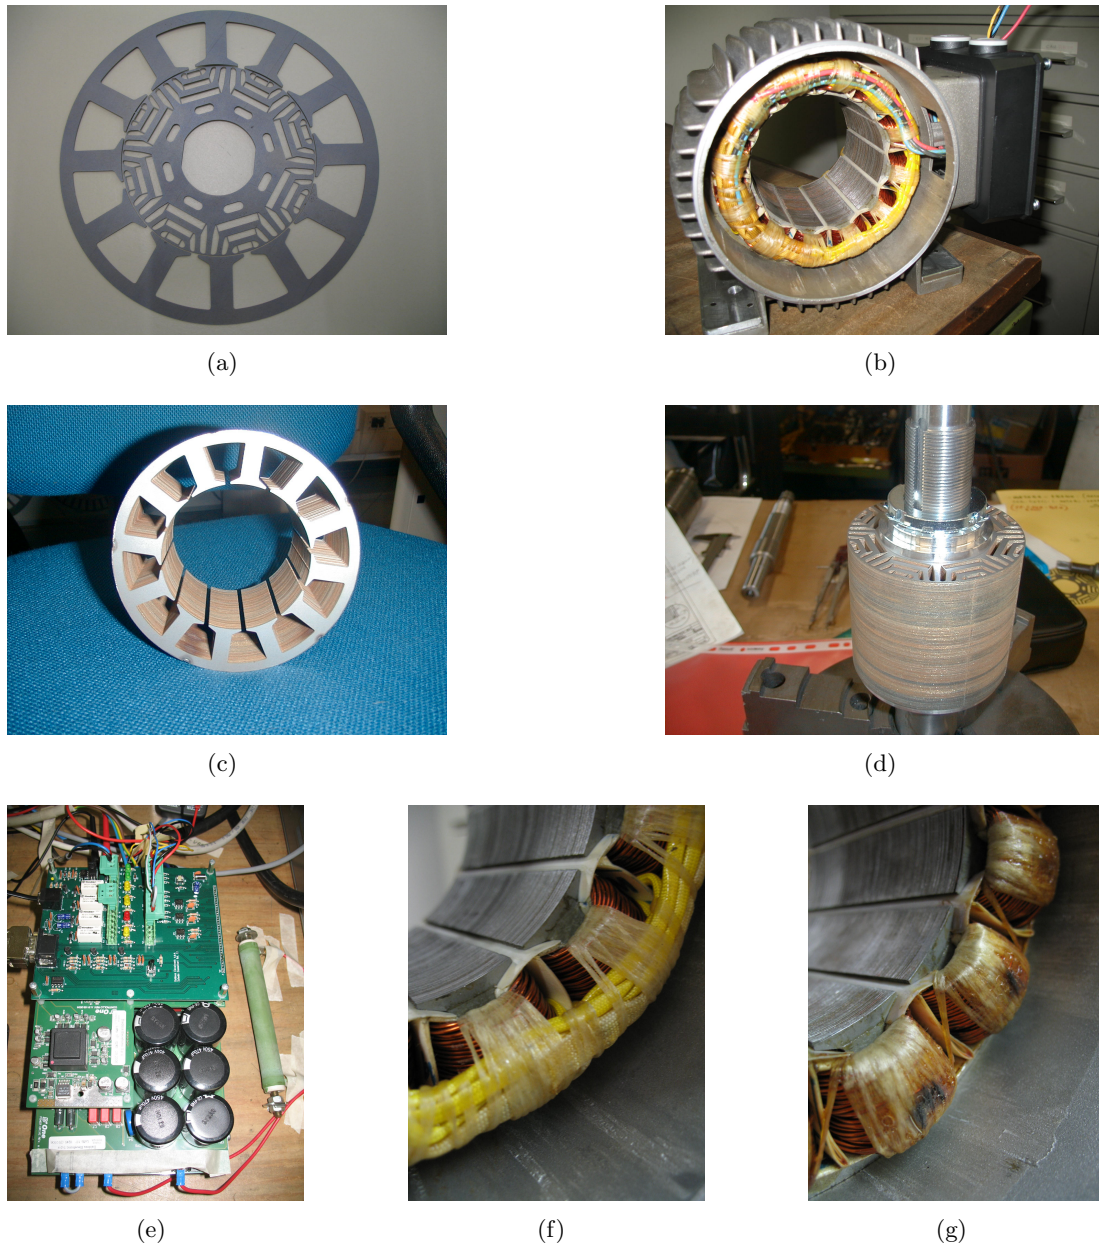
ISA prototype: (a) machine, (b) motor, (c) stator, (d) rotor, (e) commercial inverter, (f) end winding connections side, (g) end winding.
